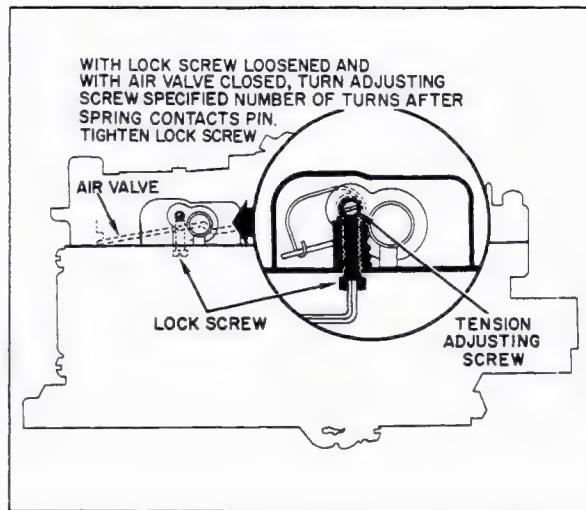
Air Valve Spring Wind-Up Adjustment
